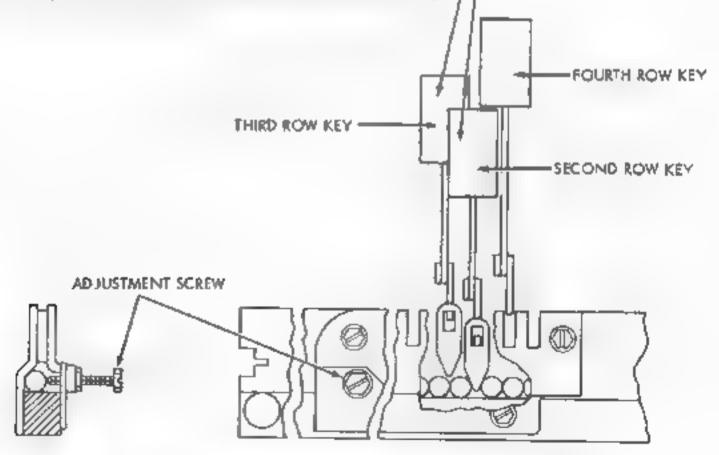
BALL WEDGELOCK, BALL END-PLAY AND UNIVERSAL BAIL LATCH MECHANISMS.
